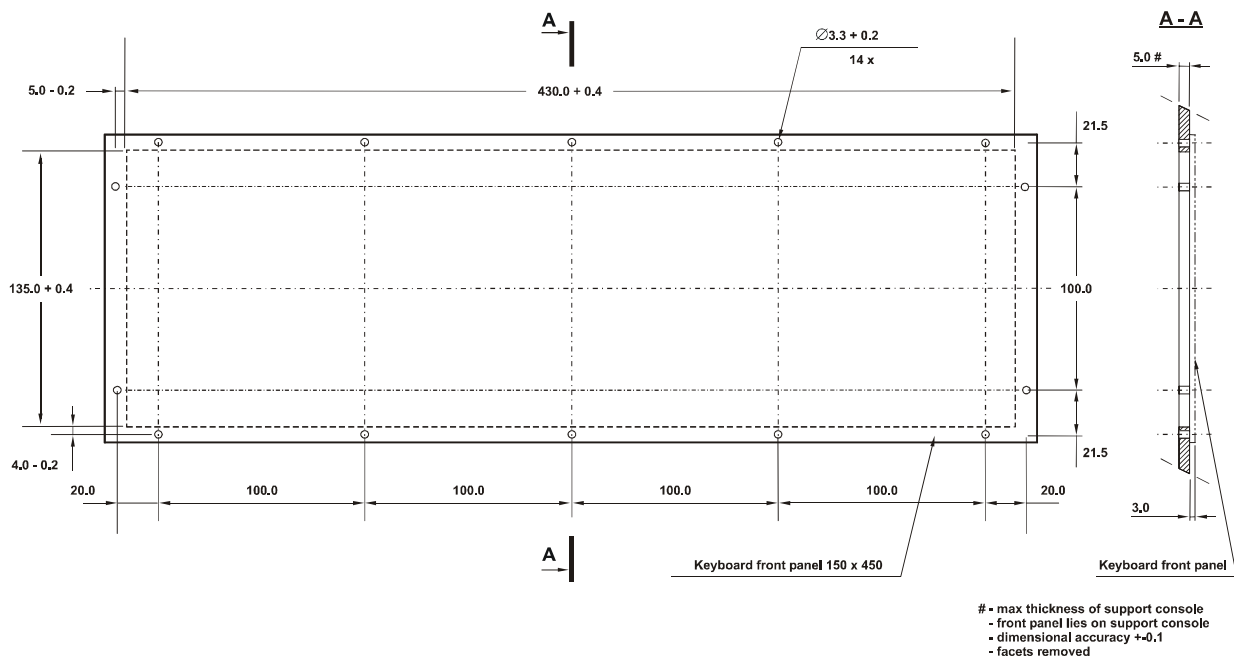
Transas ES3 dedicated keyboard. Assembly drawing without mounting frames
